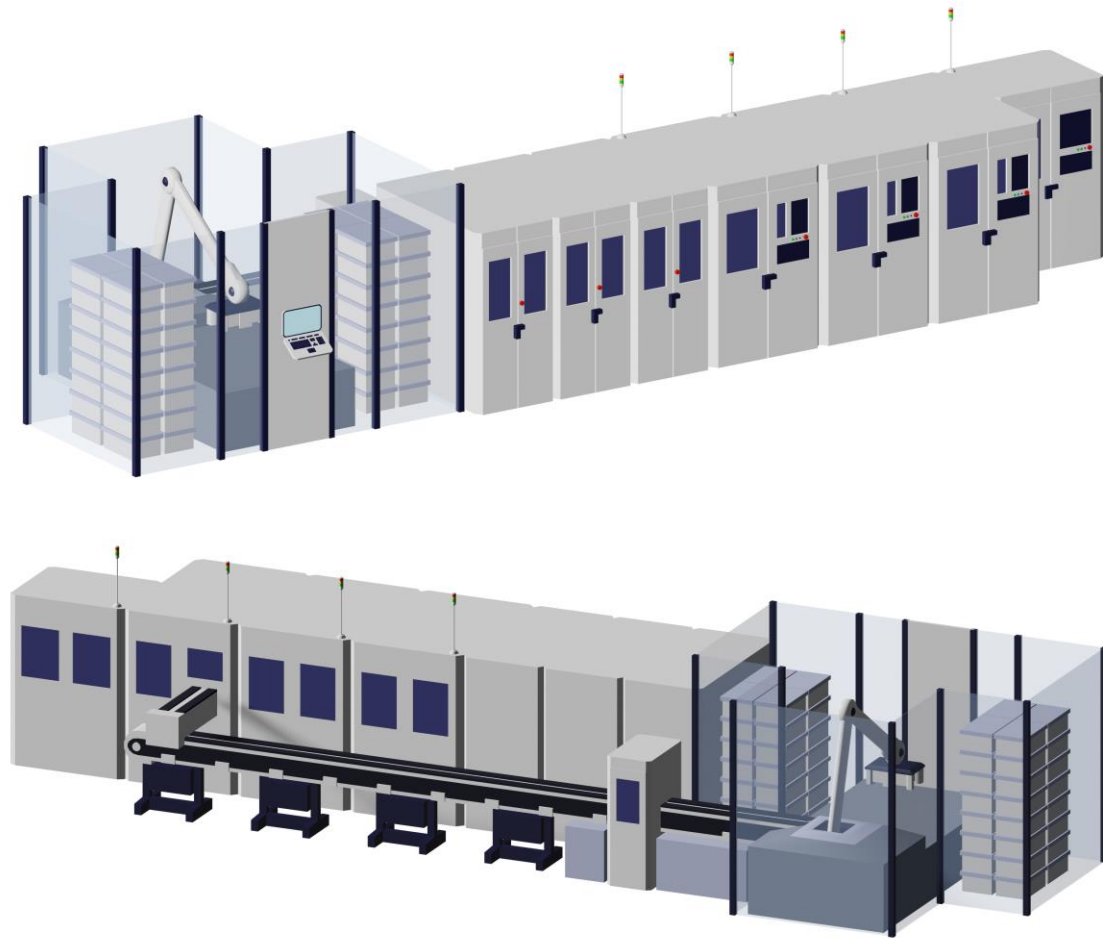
Three-dimensional model of JOT Battery Assembly Solution. The process starts where the robot arm is located, and finished product is removed from the final cabin. Above is shown the frontside and below is shown the backside of the machine line. (4.)
